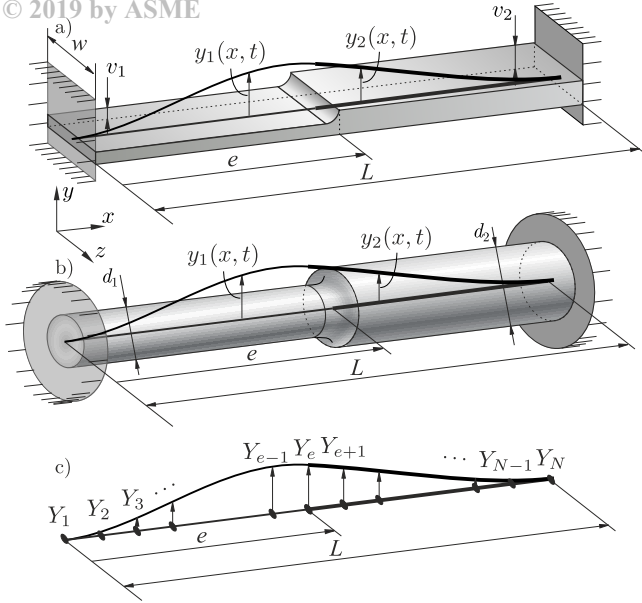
Schematic figure of the applied beam-type workpiece considering the material removal for milling (a) and turning (b) processes.
